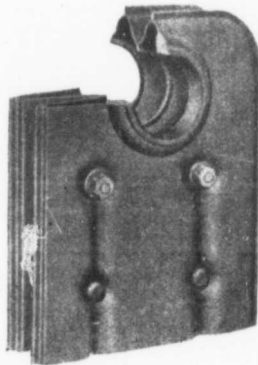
Section of a three-column pressed radiator, showing steam or water space and pipe connection. Each radiator section is made up of two pressed sheets, joined by the double seam shown in Fig. 2. The different sections, constituting a complete radiator, are joined in the same way. The joint at the pipe connection is made by folding the sheet metal snugly over a malleable-iron ring. The assembled structure is then heavily galvanized inside and out.
